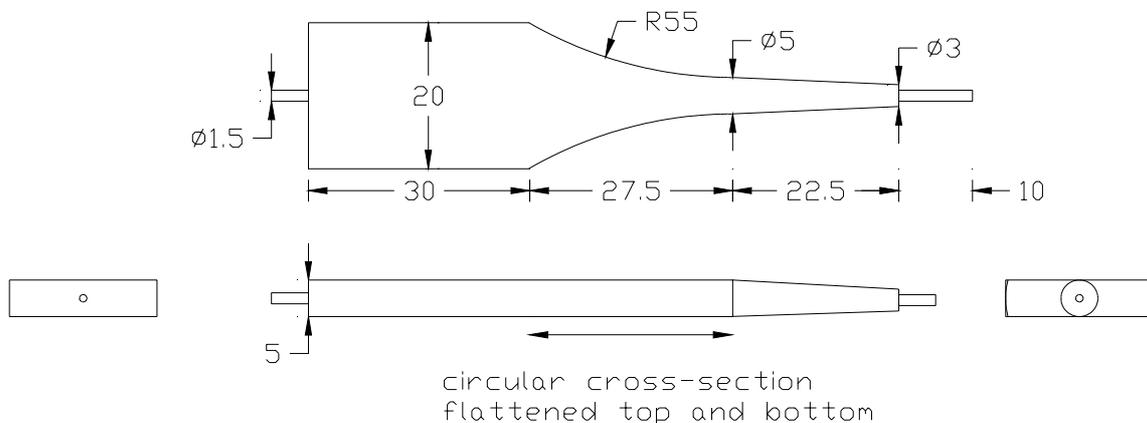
Schematic of moulding template used for producing end tabs (mm).
